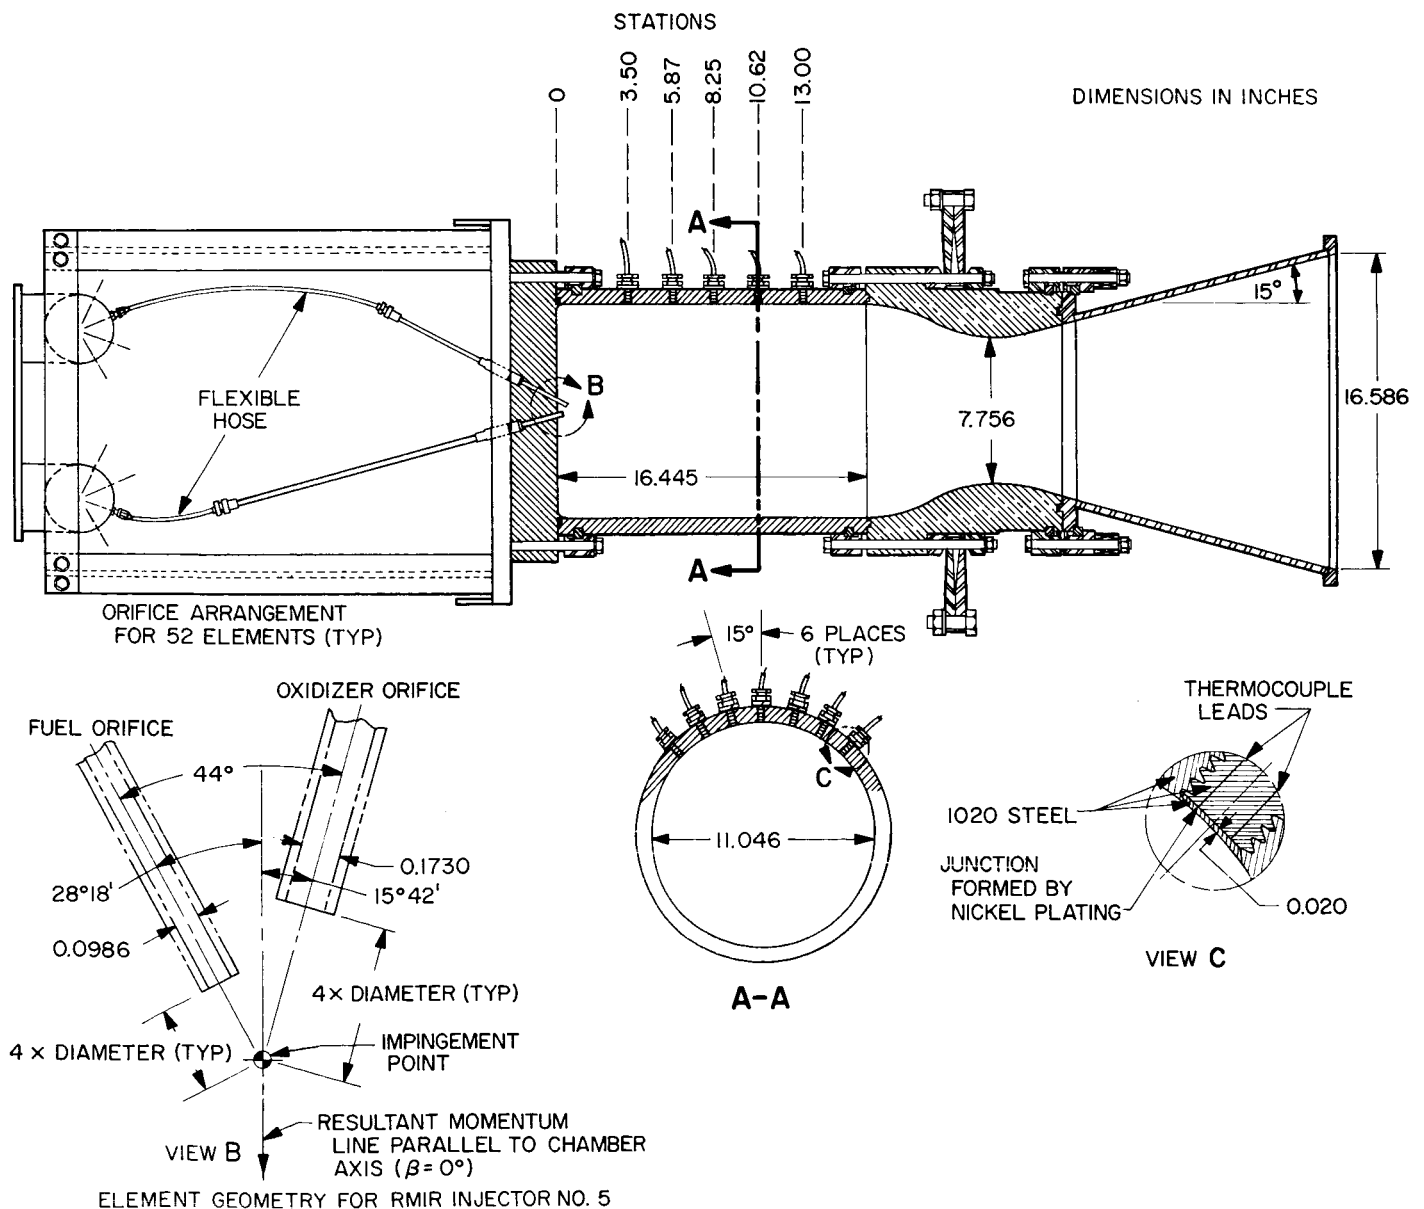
Sketch of 20,000-lb-thrust engine and components used for chamber heat transfer measurements
